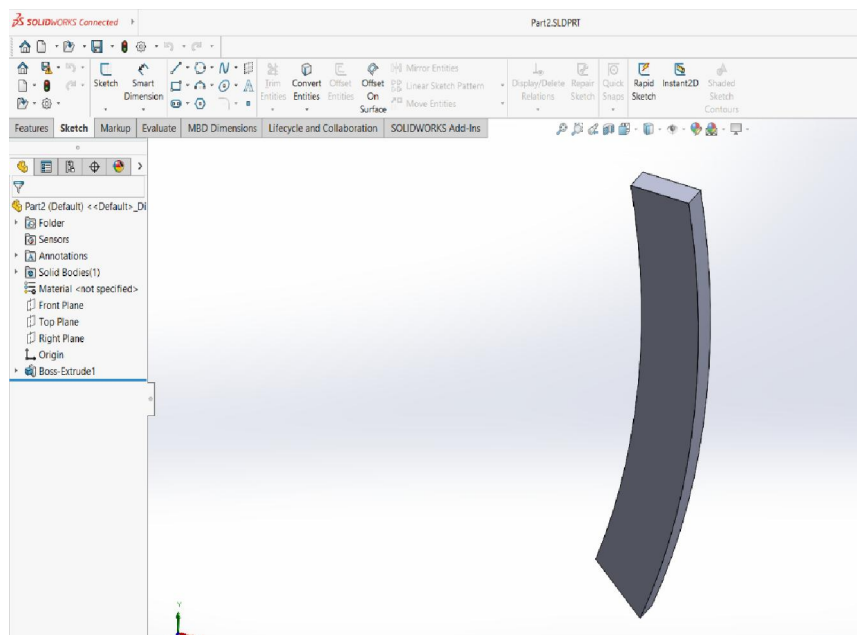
Step 4: - Wheel component 1 to adjust the movement (wheel 1 case 1)
